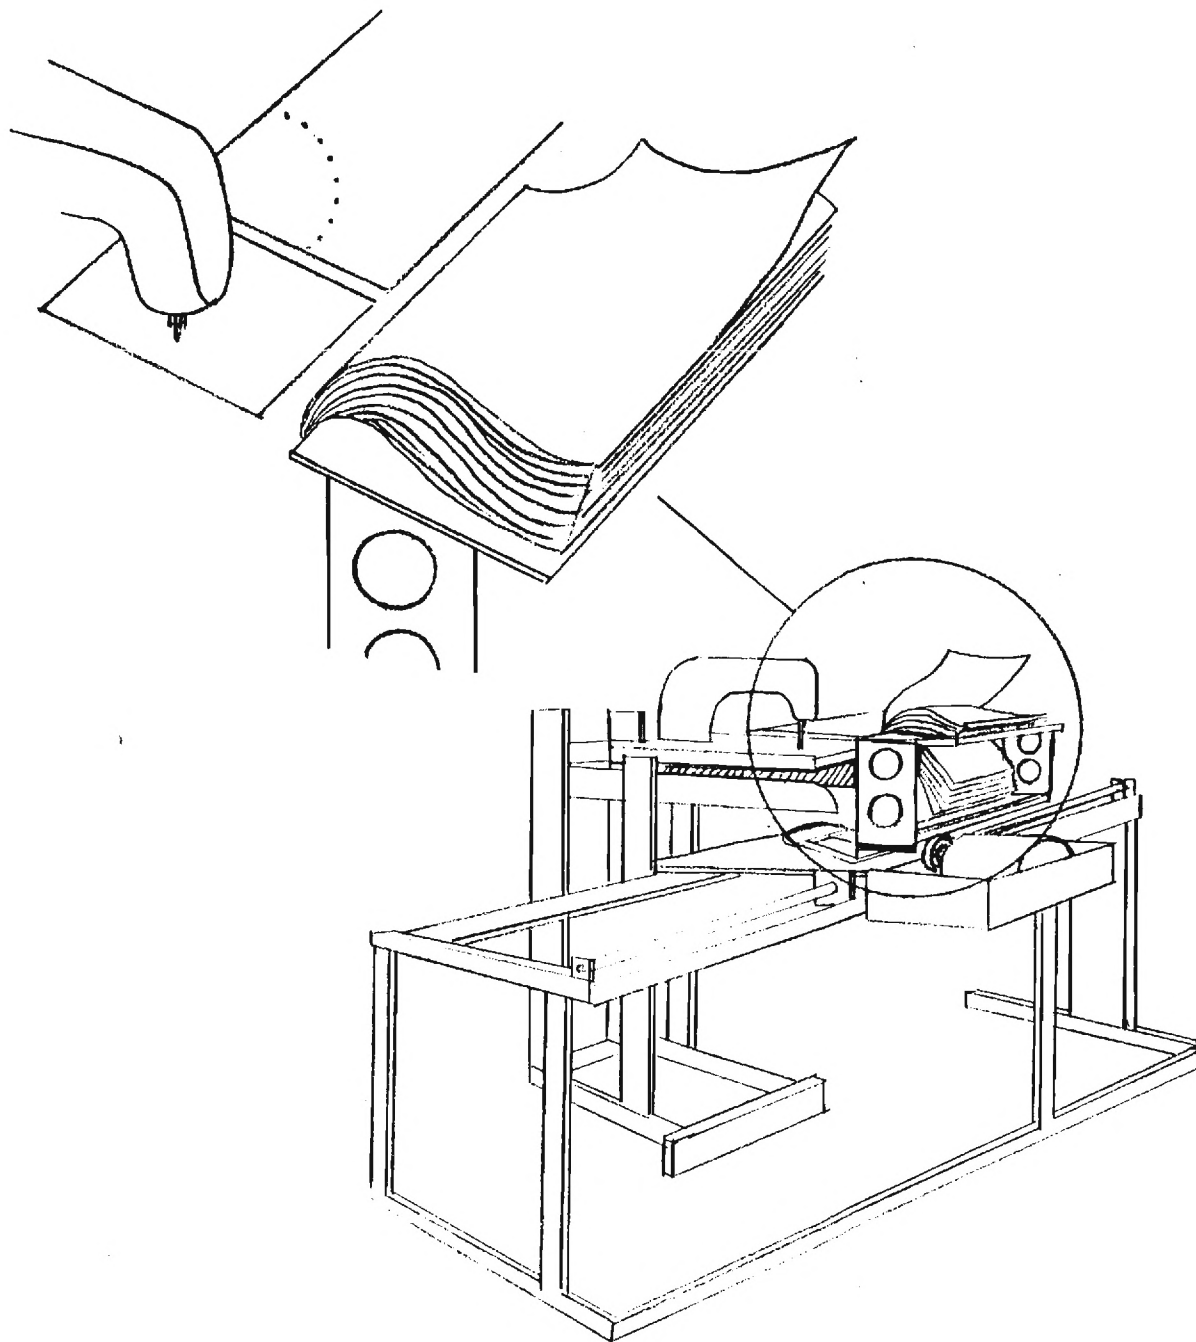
An Overall View of the Prototype Pocket Facing Machine
